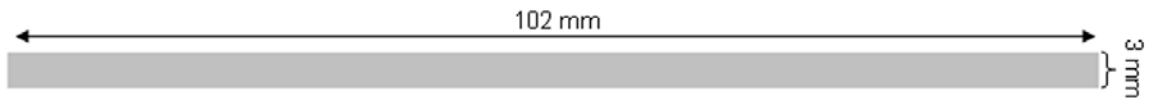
Side View of Chassis/Helicopter Mounting Adapter
